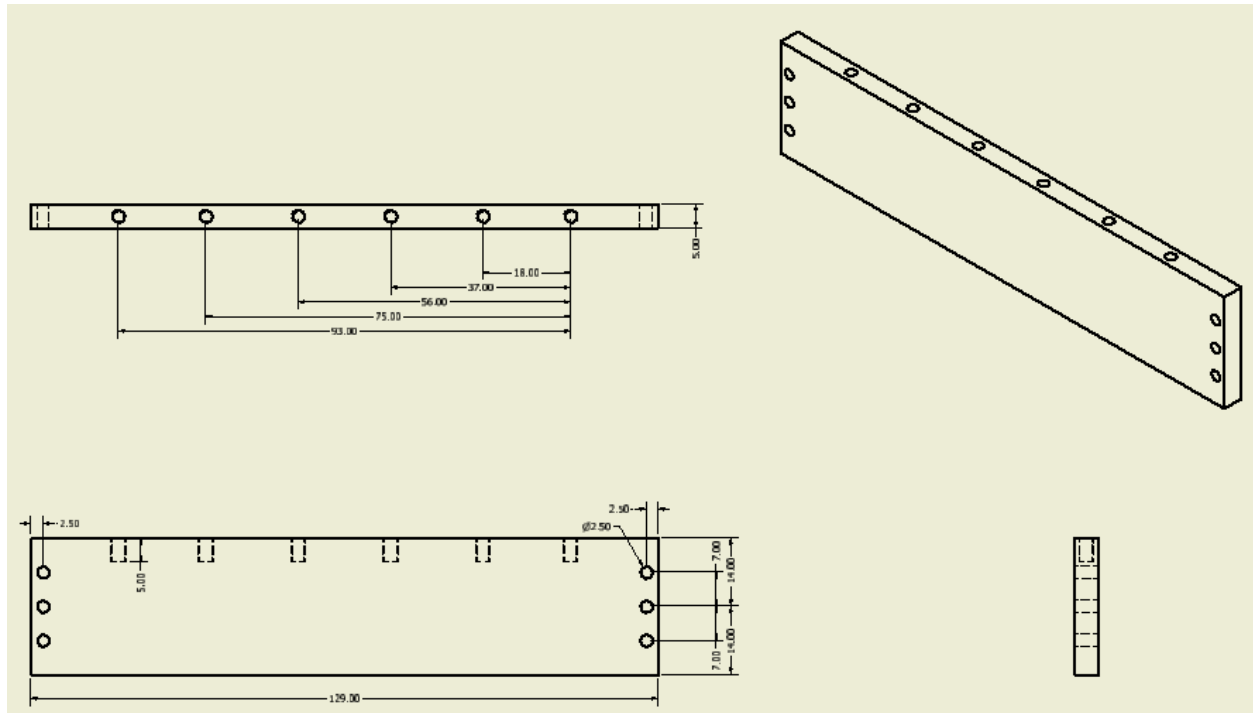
CAD drawing of the side plate for the second version LiMIT trenches
